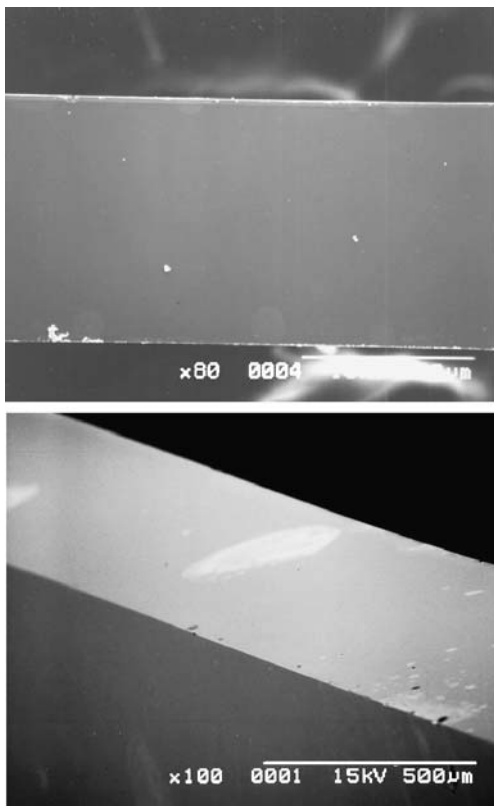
SEM photographs of the separation surfaces of the LCD glass using the method of controlled fracture with bending moment
